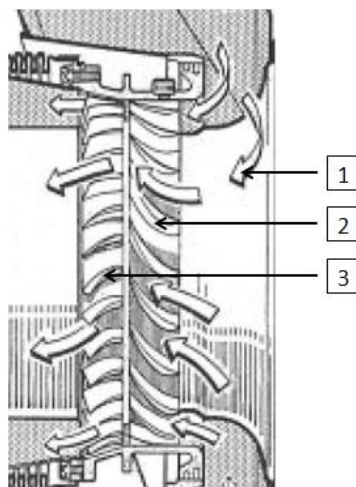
Close-up View of the Rover 1S/60 Axial Turbine. (Rover, 1966)
